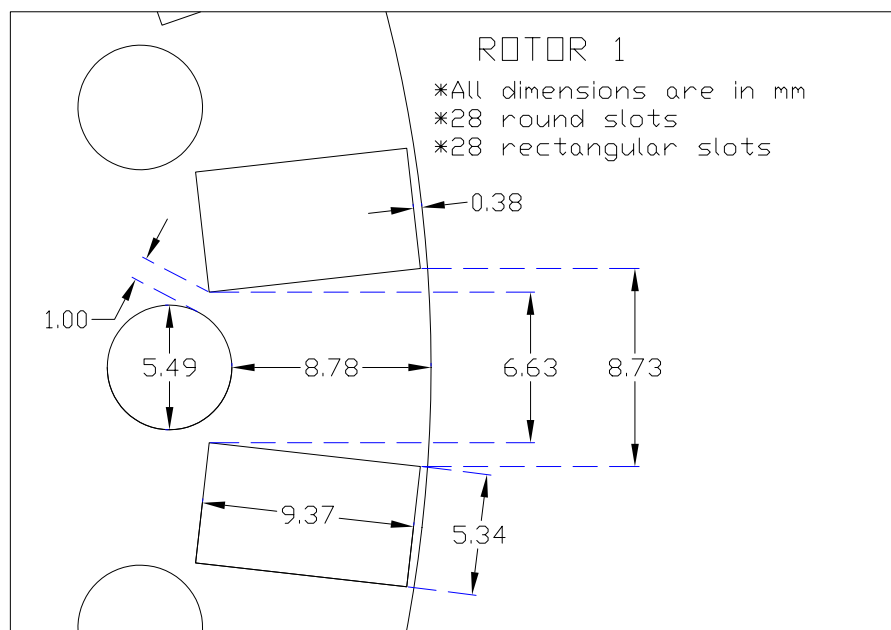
shows in detail the final dimensions of the prototype rotor including a full view of the laminations and a magnified view of the rotor slots. The inner rotor dimensions and
